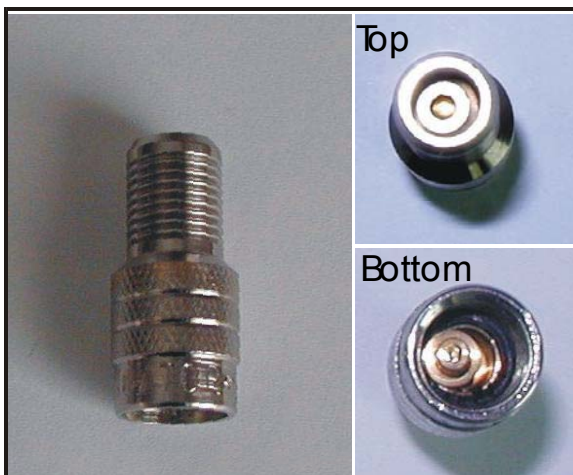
Alligator valve cap. The top and bottom views show the core “cocked”.
